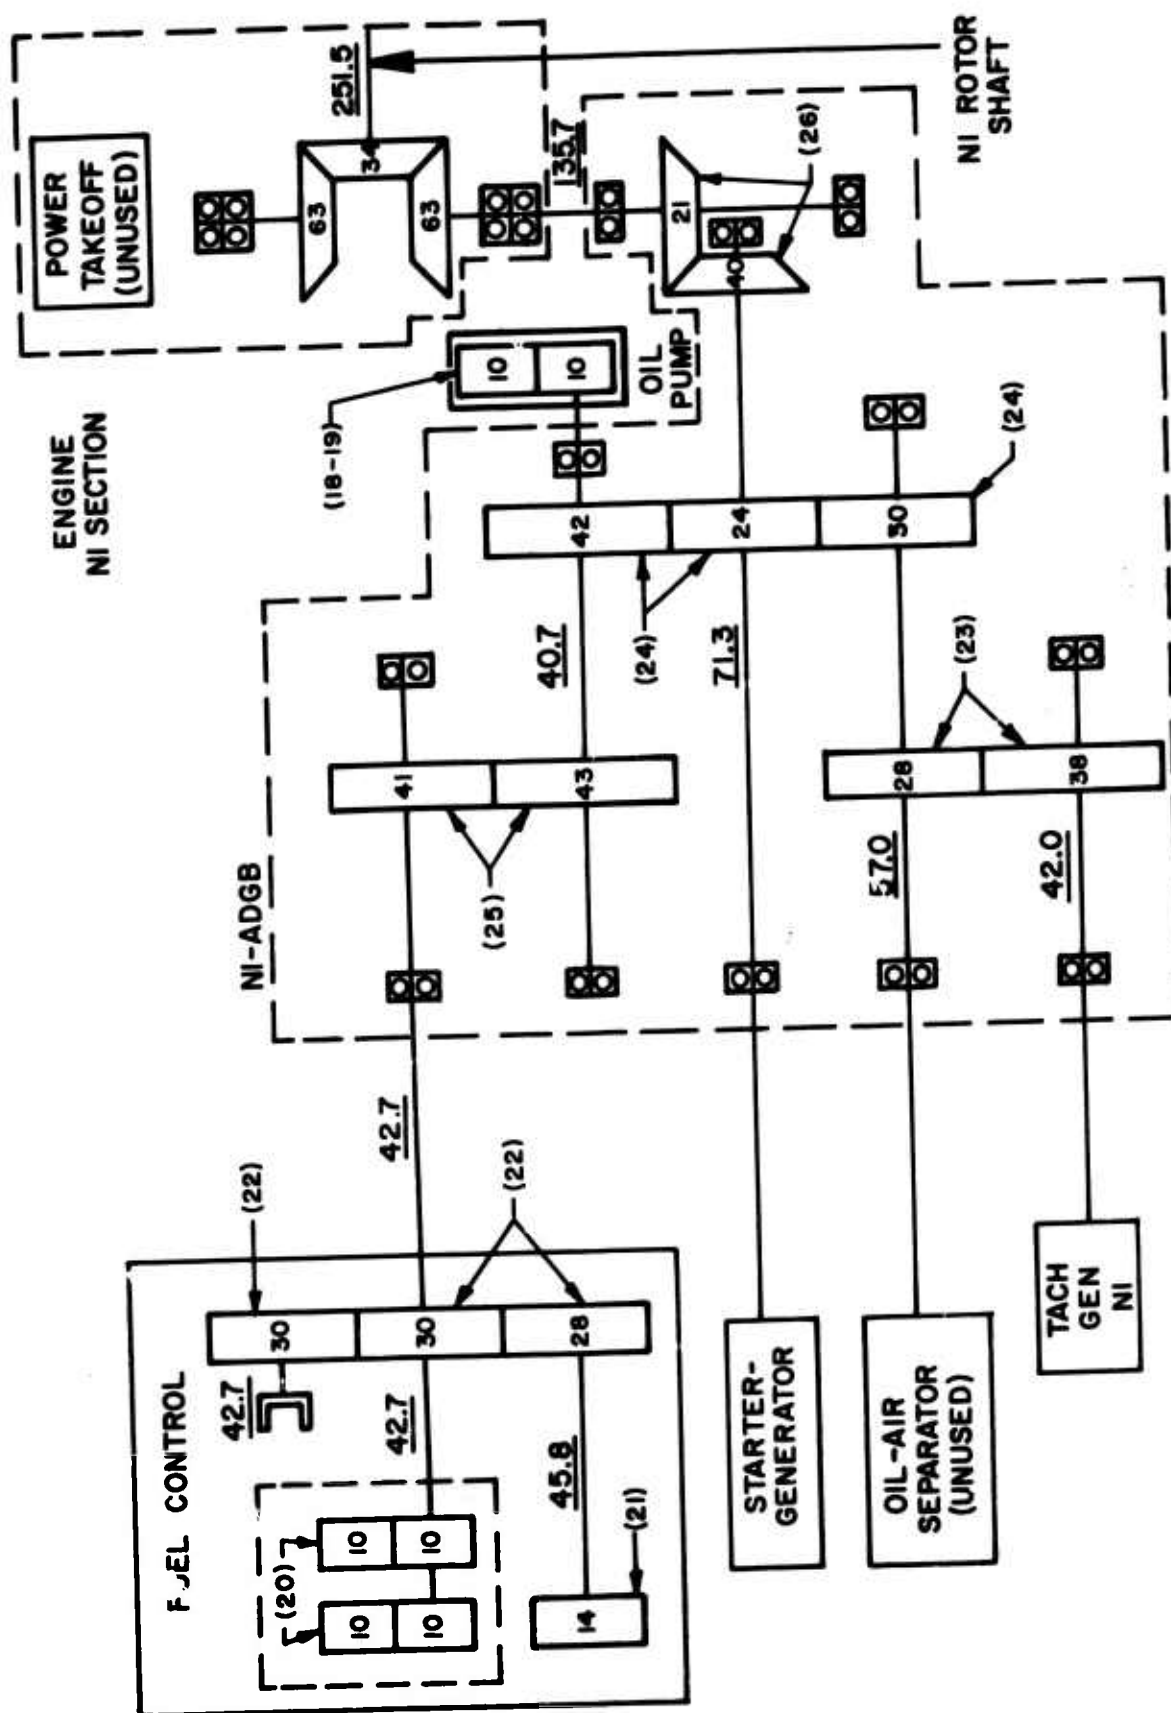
Gear Train Schematic - Models T53-L-9, T53-L-9A, and T53-L-11 Engines - Gas Producer Section (N1).
